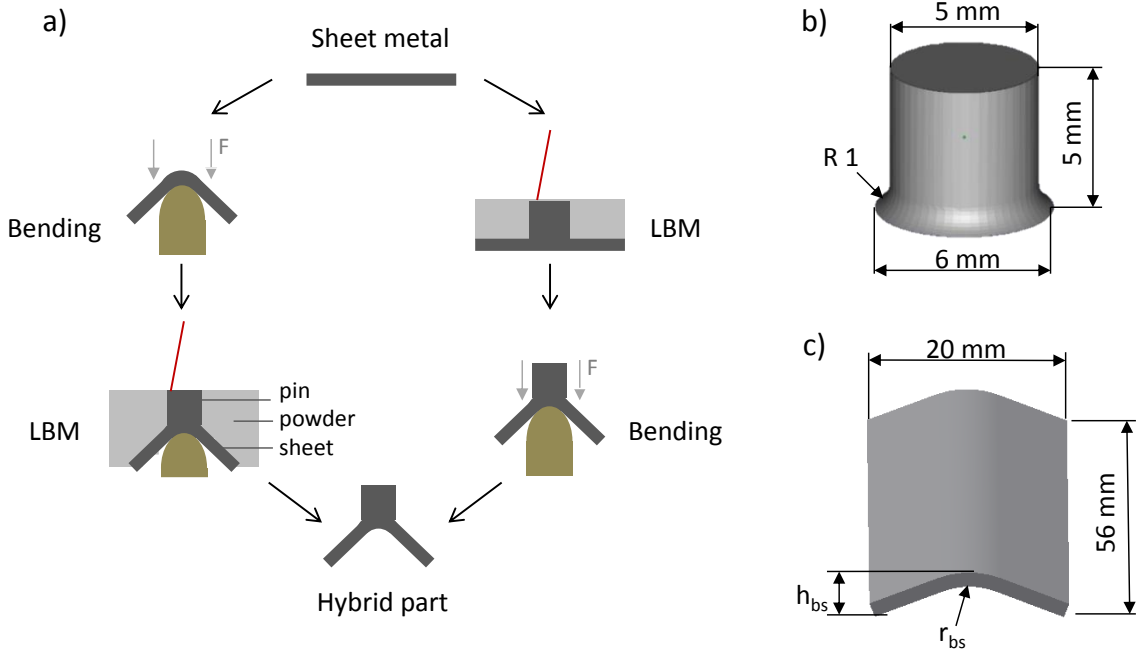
a) Different process routes for the investigated process chain combining sheet metal bending and laser beam melting; b) dimensions of the LBM sample part; c) dimensions of the bending specimen with varied parameters
